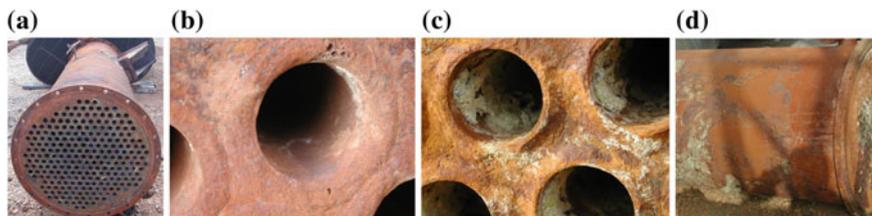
a General view of failed heat transfer oil heater. b General and pitting corrosion of the tube-sheet. c Severe corrosion of the tube-sheet and tubes (deposits are accumulated inside the tubes; the ends of the tubes are out from corroded tube-sheet). d Corrosion of outer surface of heat transfer oil heater under thermal insulation
